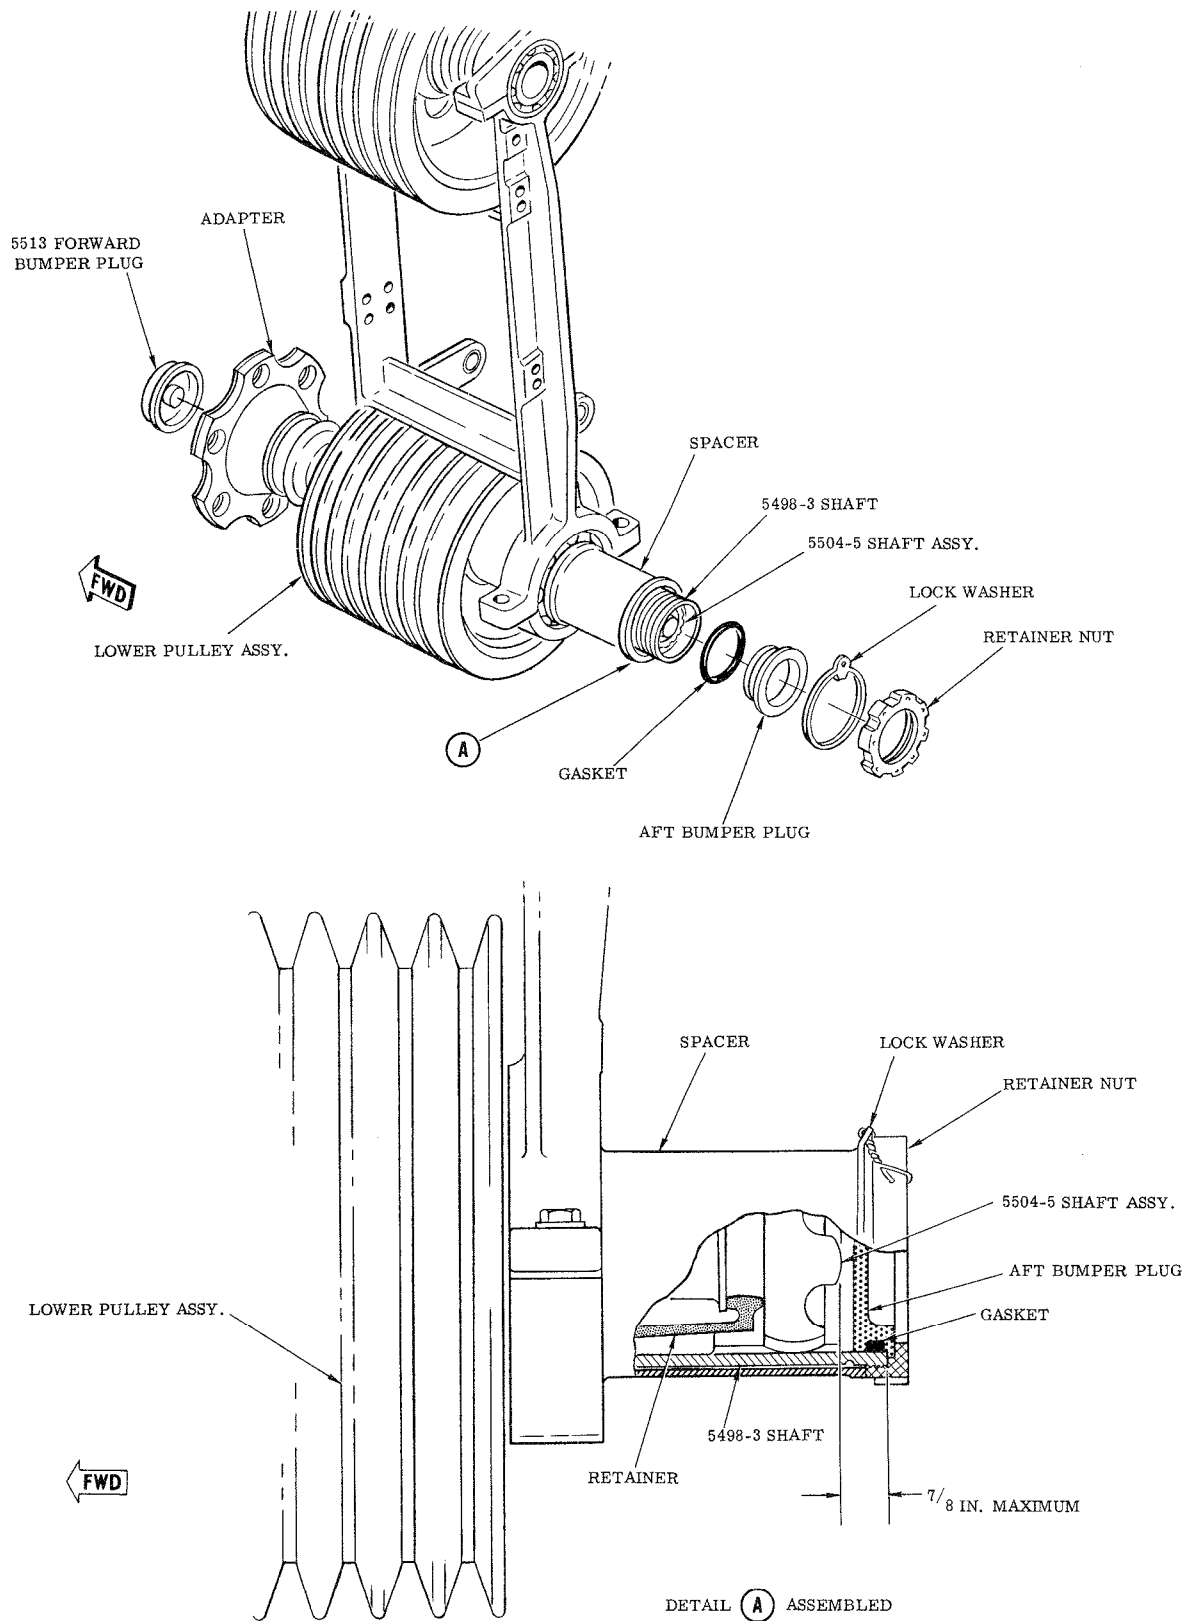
Inspection-Lower Coupling Drive Shaft, Forward Bumper Plug
